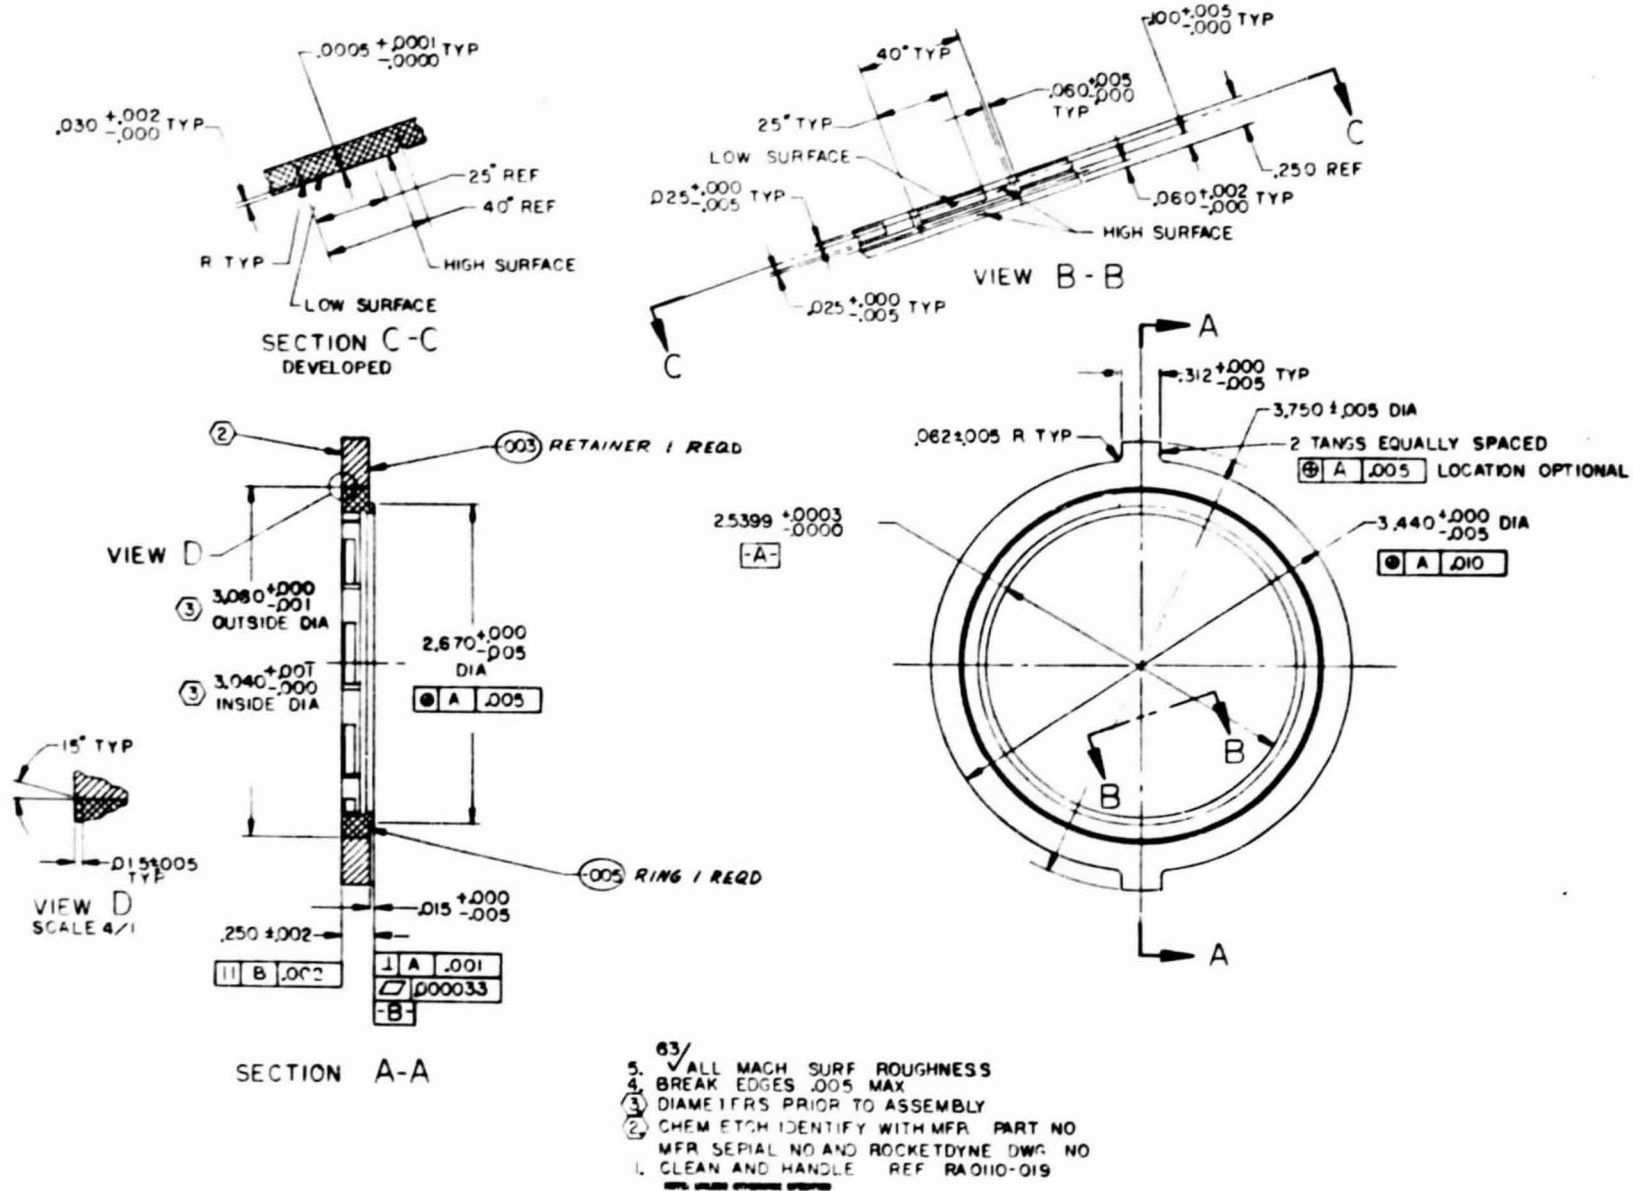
Rayleigh Step Pad Secondary Seal Ring
